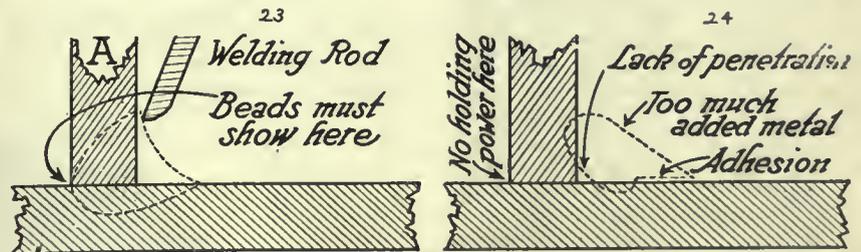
PROPERLY EXECUTED FILLET WELD. FIG. 24—COMMON TYPE OF FILLET WELD.
